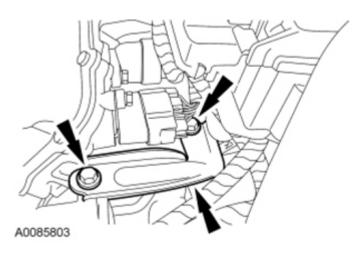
Locating Upper Insulator Nuts Courtesy of FORD MOTOR CO.
